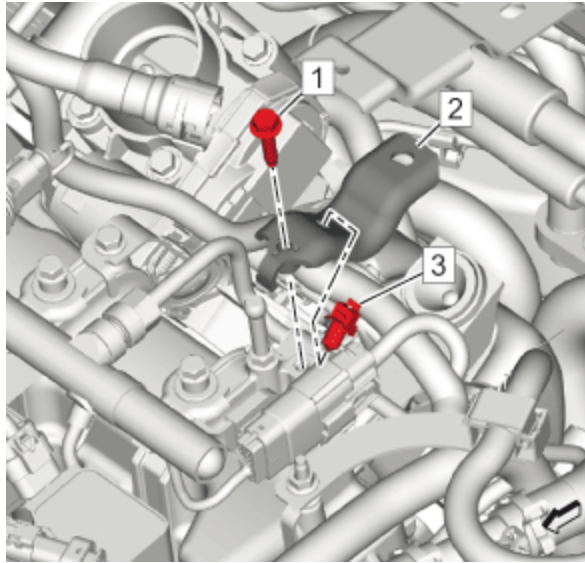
Air Cleaner Resonator Bracket, Bolt And Wiring Harness Clip
